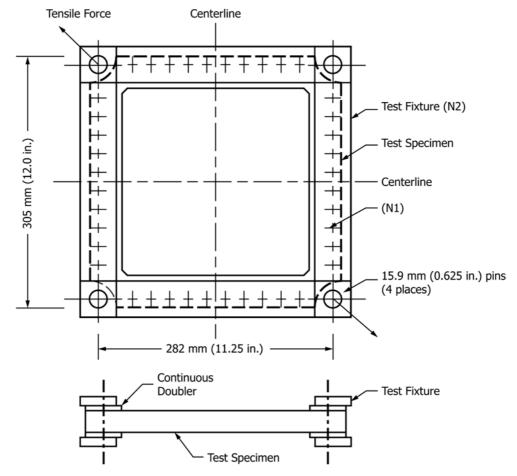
Panel In-Plane Shear Test Specimen and Test Fixture - Procedure C shown
